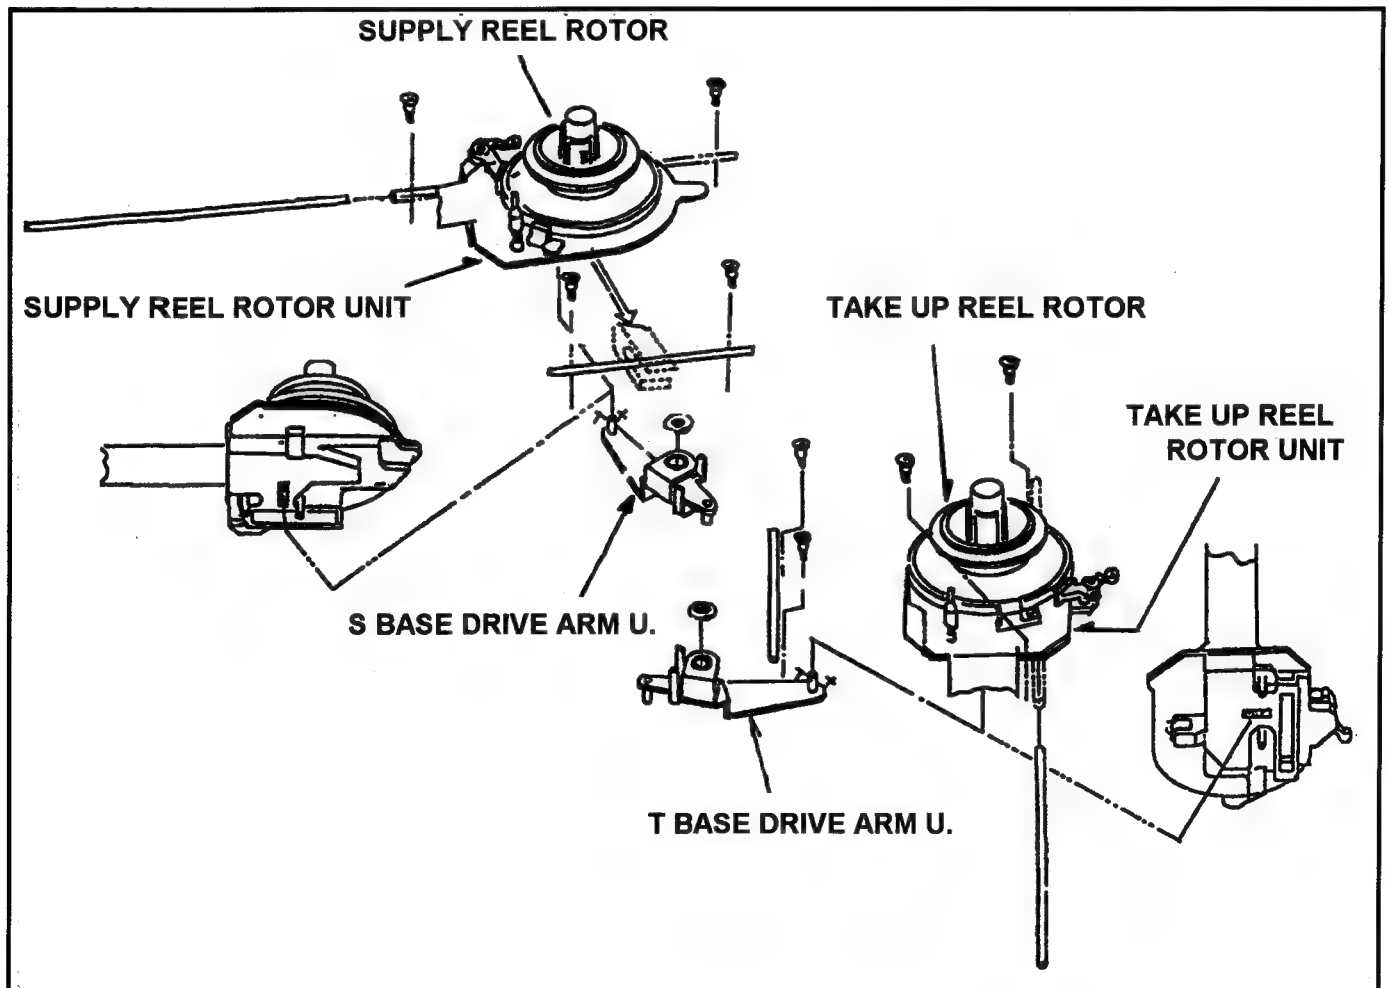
Installation of S & T Reel Rotor Unit
